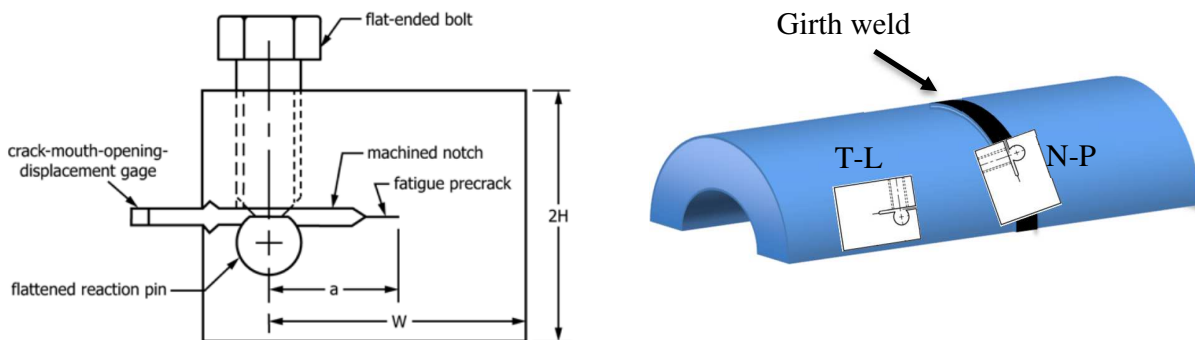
(Left) Modified bolt-load compact specimen according to ASTM E1681; (Right) Specimen orientation on parent pipe or girth weld.
